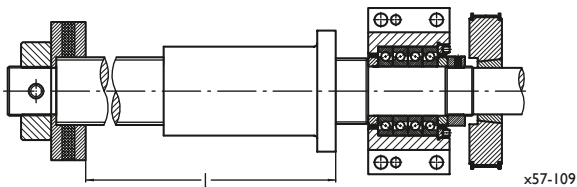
Ball screw with fixed clamping - opposing side free
